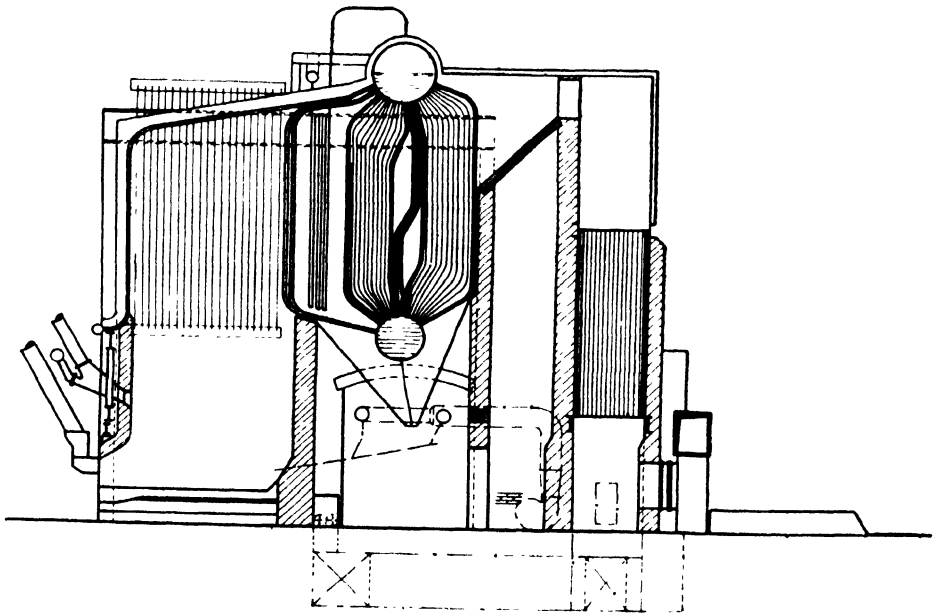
Bi-drum boiler to burn bagasse and coal.
